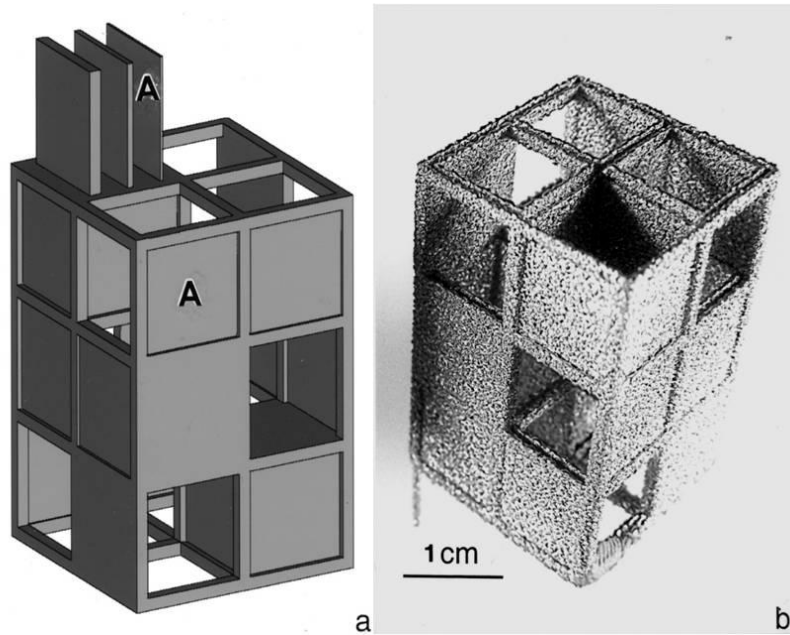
a) CAD design of component simulating thin specimens. b) fabricated component
